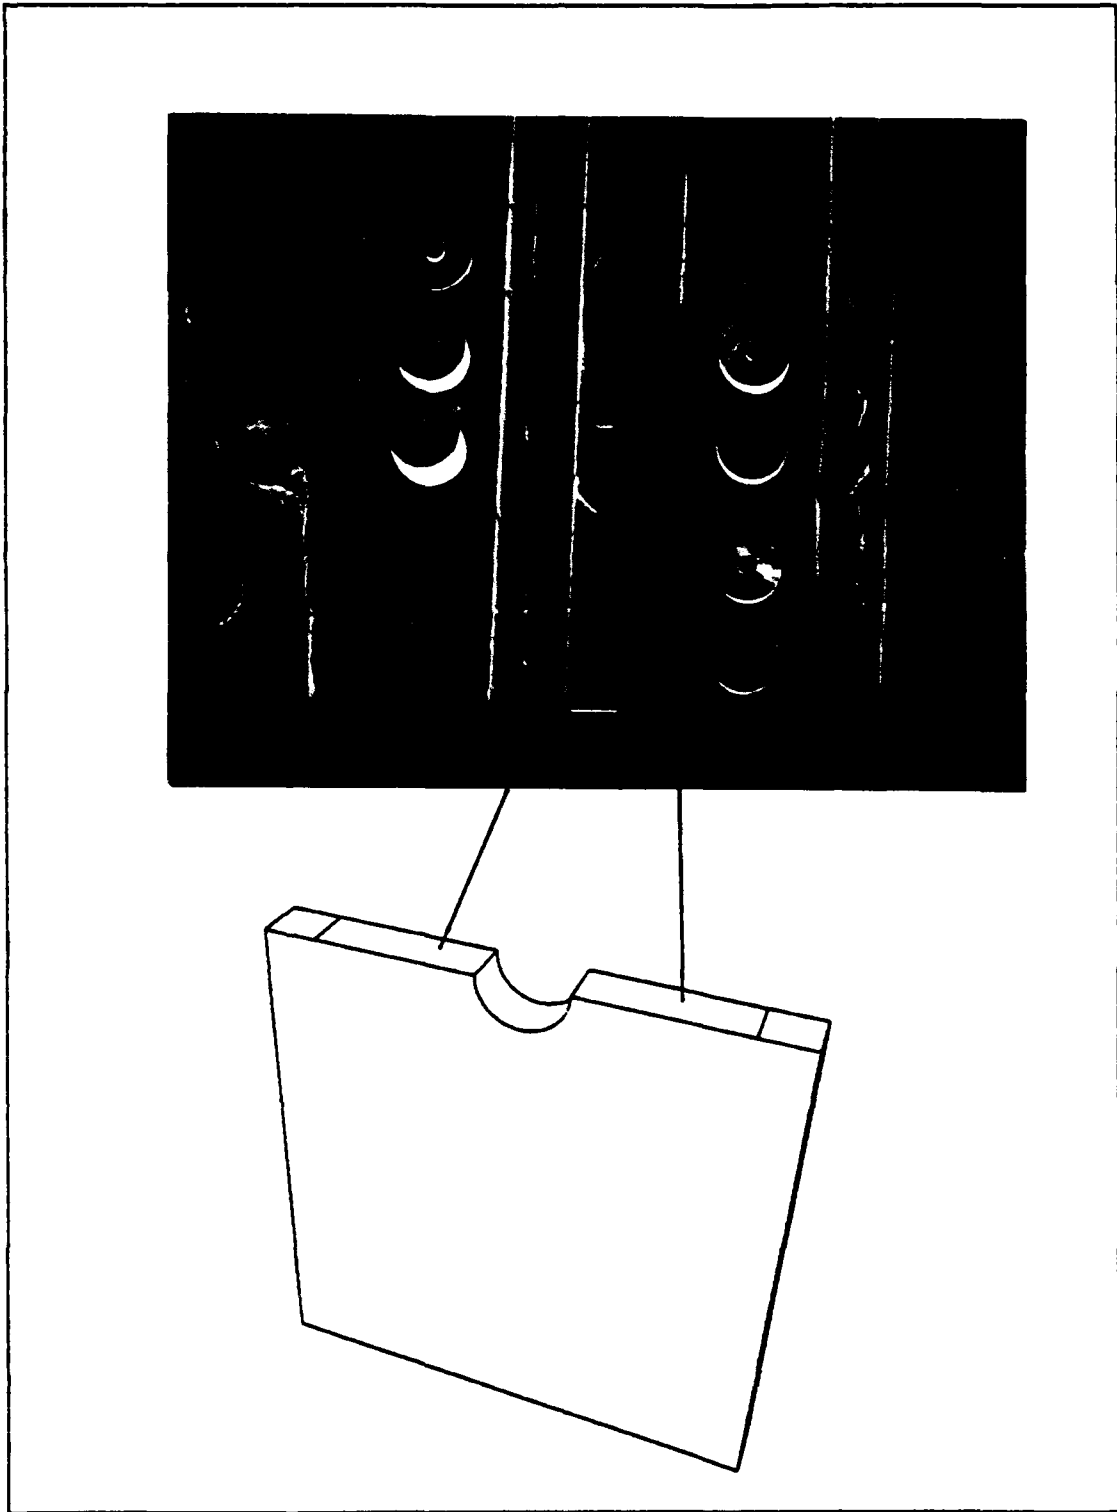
Fracture Surface of a Fatigued Specimen (at the hole)
